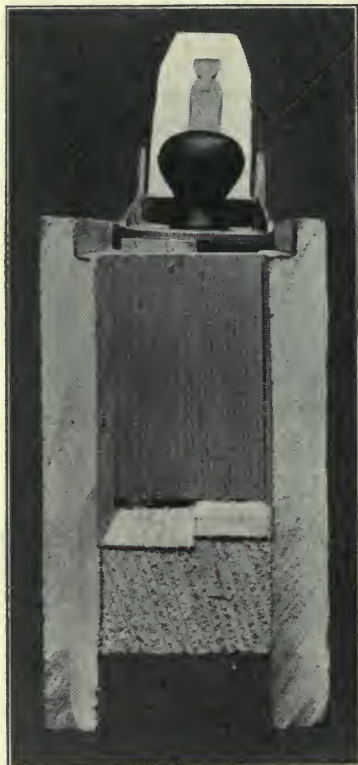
End View of Planing Jig. Courtesy of E. E. McNary, Springfield, Mass.
